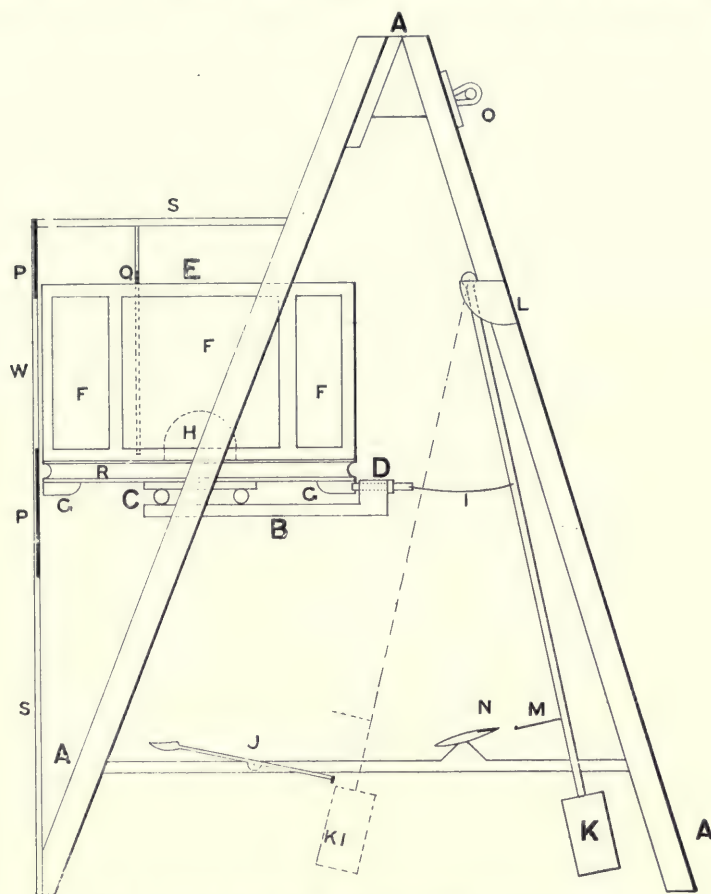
Side Elevation. Scale about 1 inch = 1 foot.
